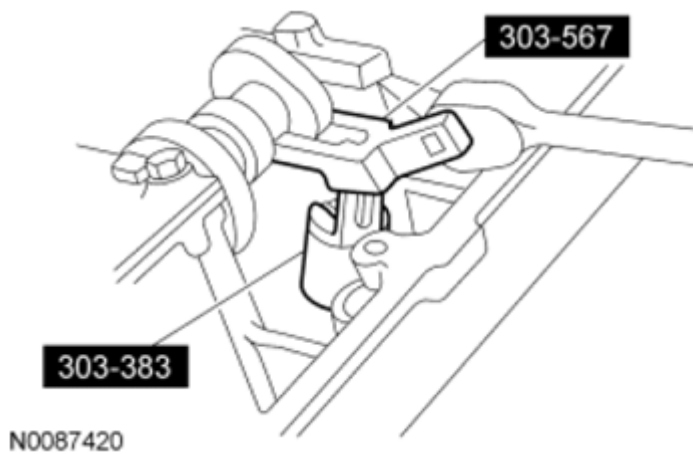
Installing Valve Stem Seals Using Valve Stem Oil Seal Installer And Valve Spring Compressor
